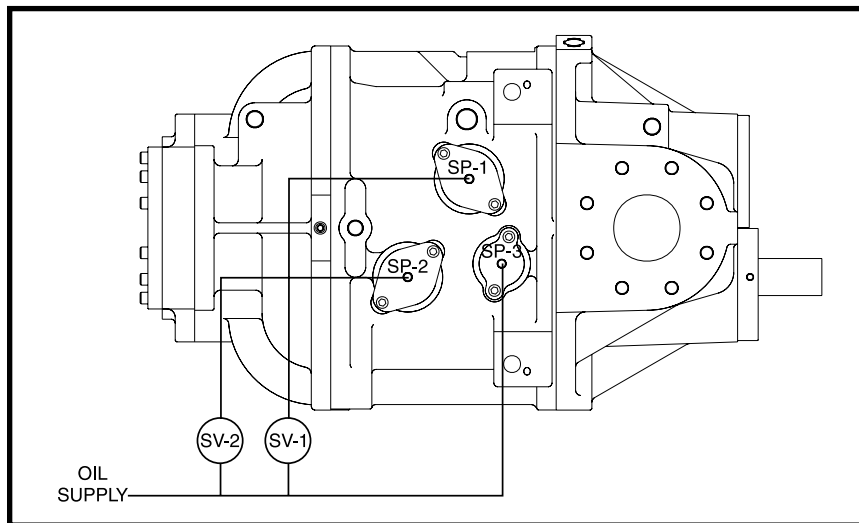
TDSL 283S & 283L 3-Step P & I Diagram with 4-Step Machine (bottom view)
